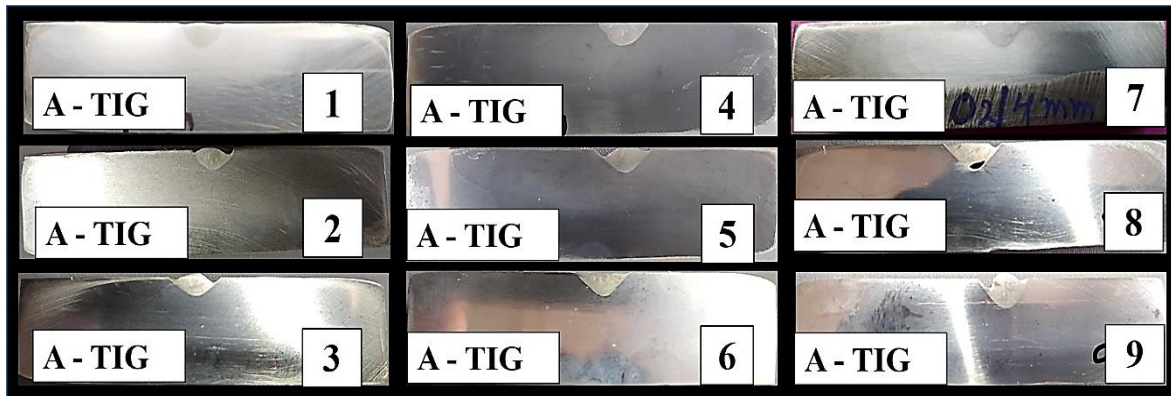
Macrograph of AA – TIG welding (1 To 9)
